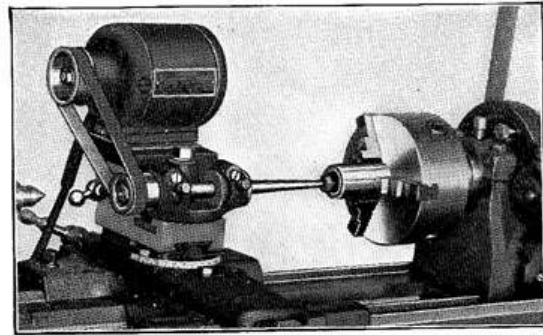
Grinding the Inside Diameter of a Hardened Steel Bushing.
